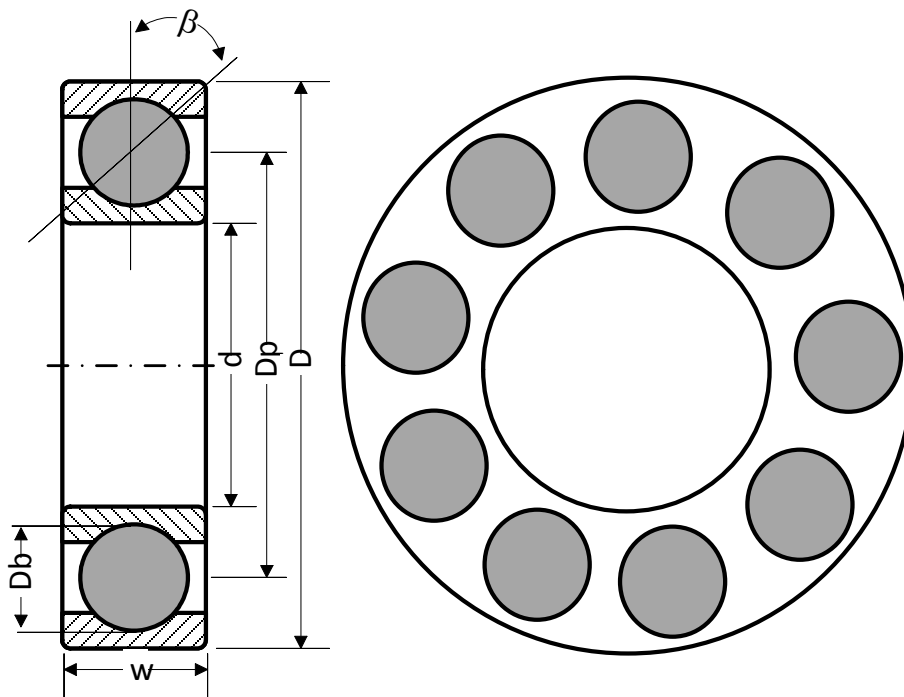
Geometry of a Rolling-Element Bearing [101]
